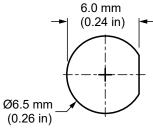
Recommended Mounting Hole Dimensions for the CSB-RGFB-102-UFFR Cable Assembly
